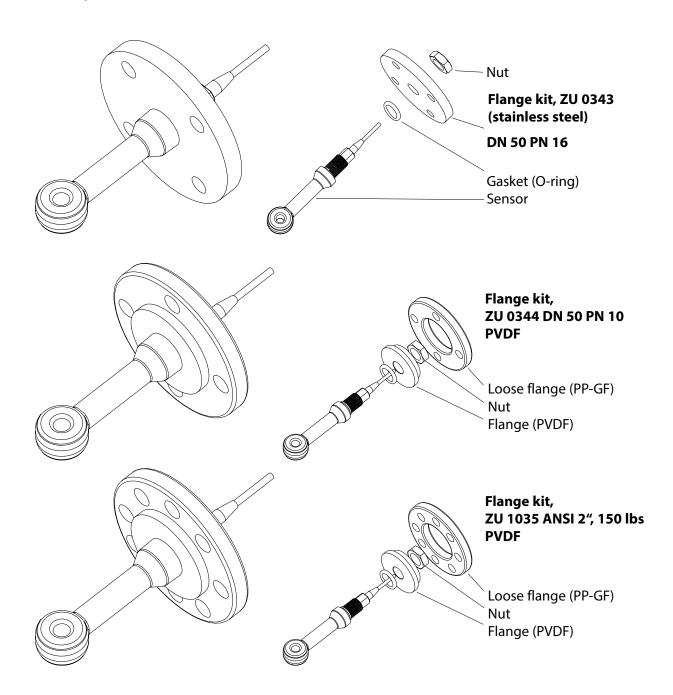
Assembly with DN 50, ANSI 2" loose flange
